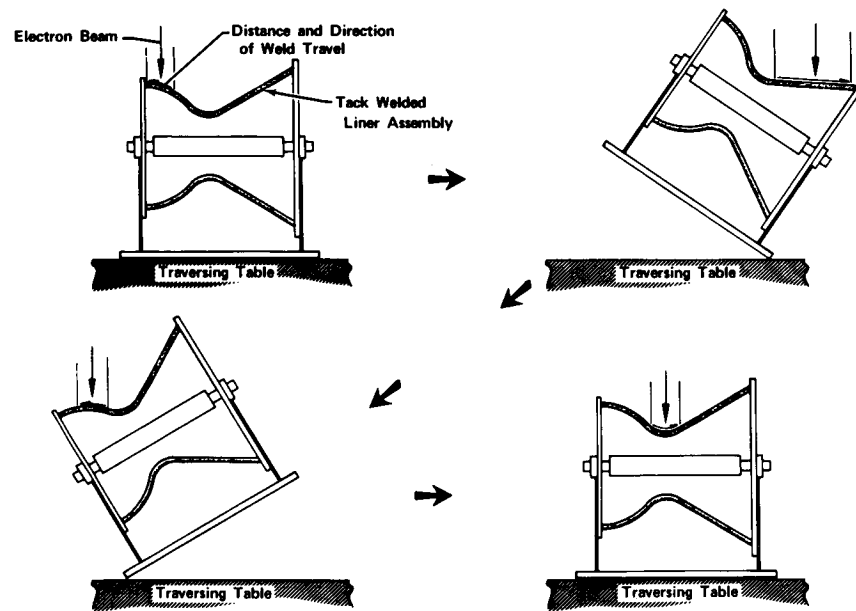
Sequence for Electron Beam Welding THERMAL SKIN® Throat Section
